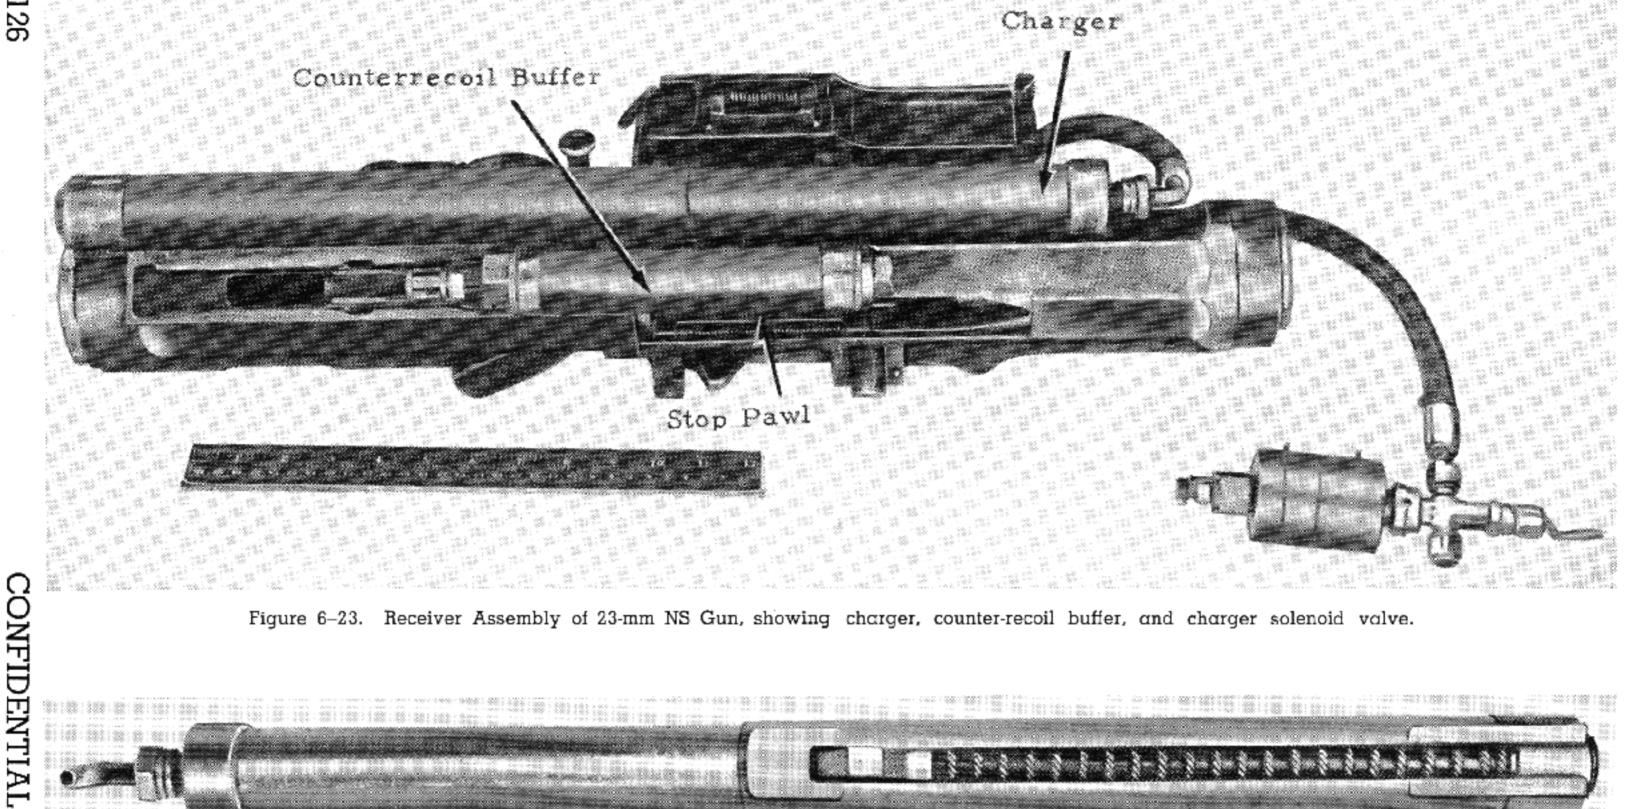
Receiver Assembly of 23-mm NS Gun, showing charger, counter-recoil buffer, and charger solenoid valve.
